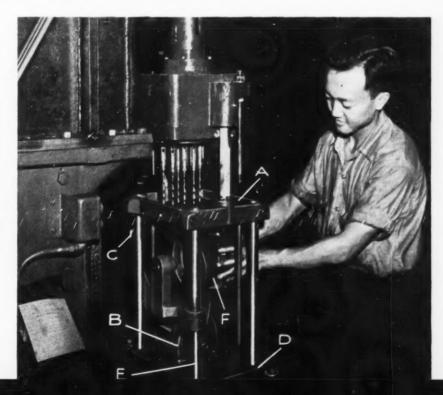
The work-piece is enclosed within the body of this cover type drill jig. A bushing plate or cover is located by means of two pins and locked in place by two swing C-washers.
